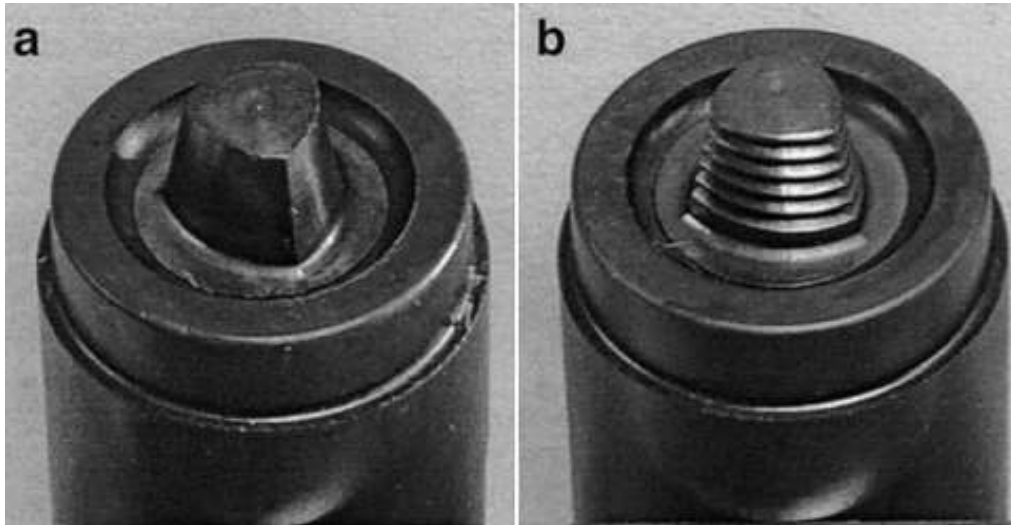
TWI Trivex tool (a) and MX-Trivex tool (b)
